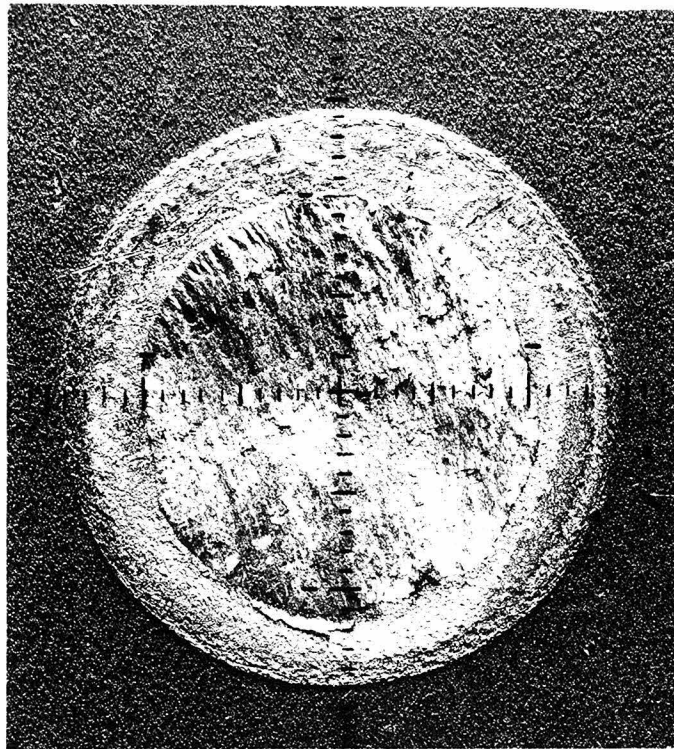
SPOT WELD FAILURE BY SHEAR THROUGH THE NUGGET AT THE FAYING PLANE.
